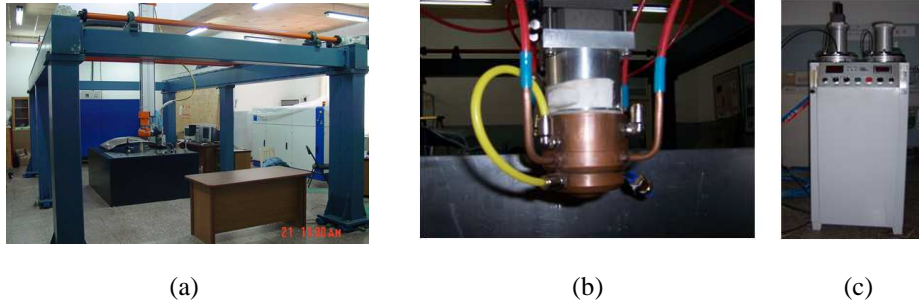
(a) The CNC-machine in LLIM, (b) The coaxial nozzle, (c) powder feeder for DFL.
